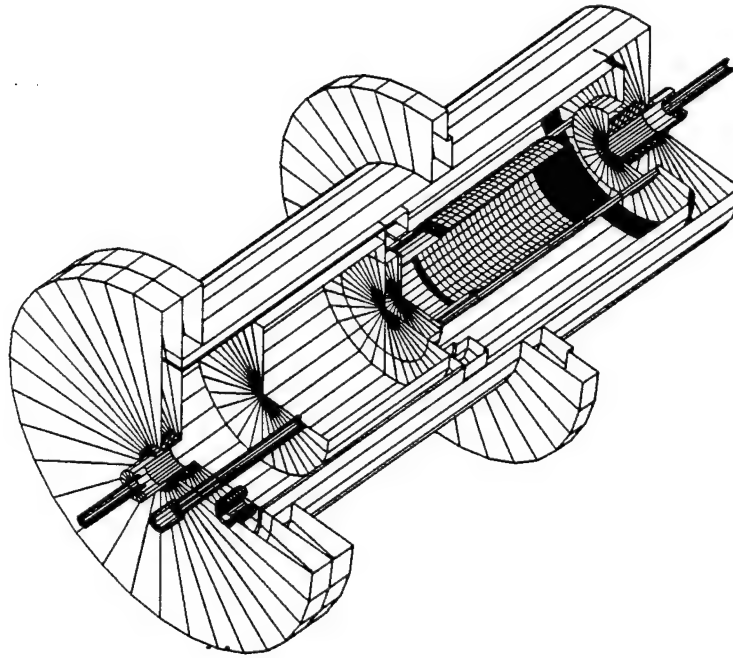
Three-Dimensional Plan View of Gas Heating Assembly.
